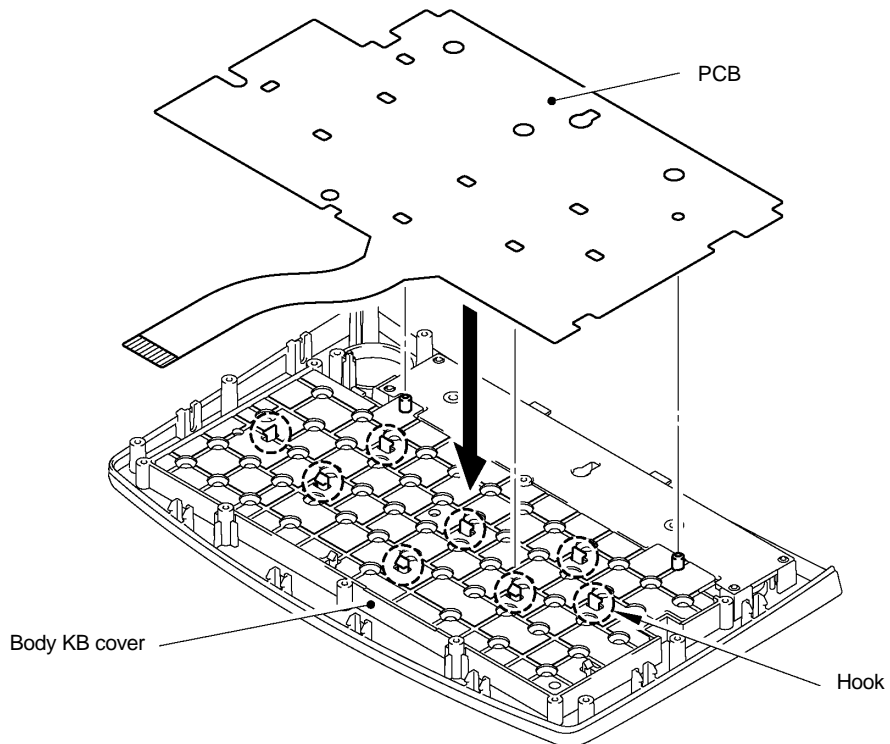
Reassembling the KB Unit/Rubber Key Unit (3)
